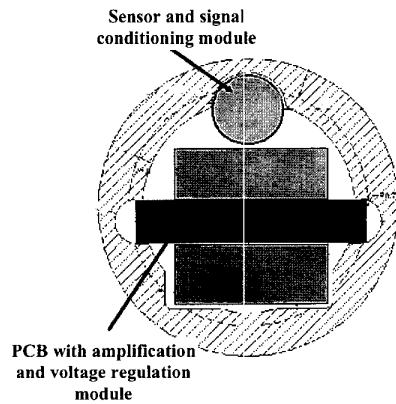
Cross sectional view of service module chamber of guide-rod's head part.
